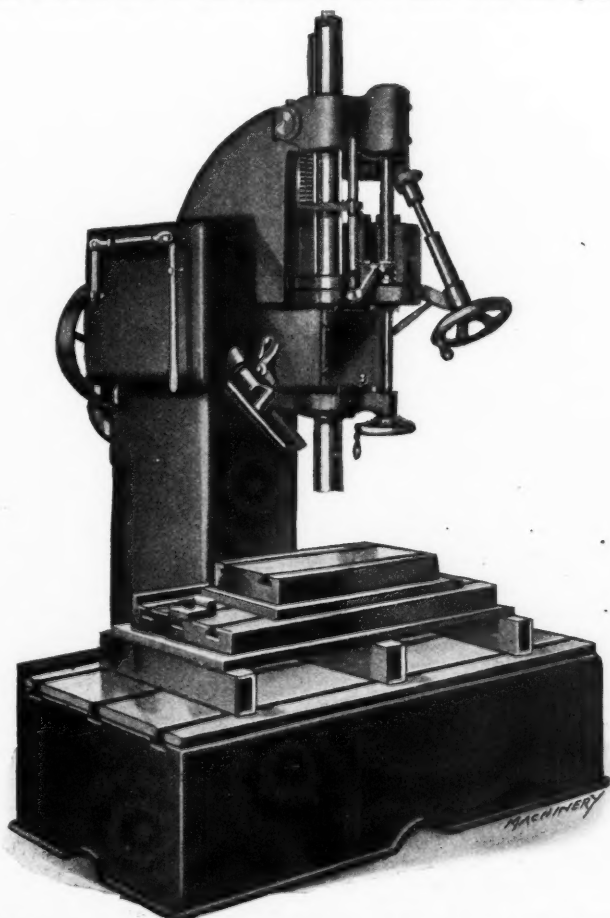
Medina Universal Spacing Machine for Jig Boring and Similar Operations
